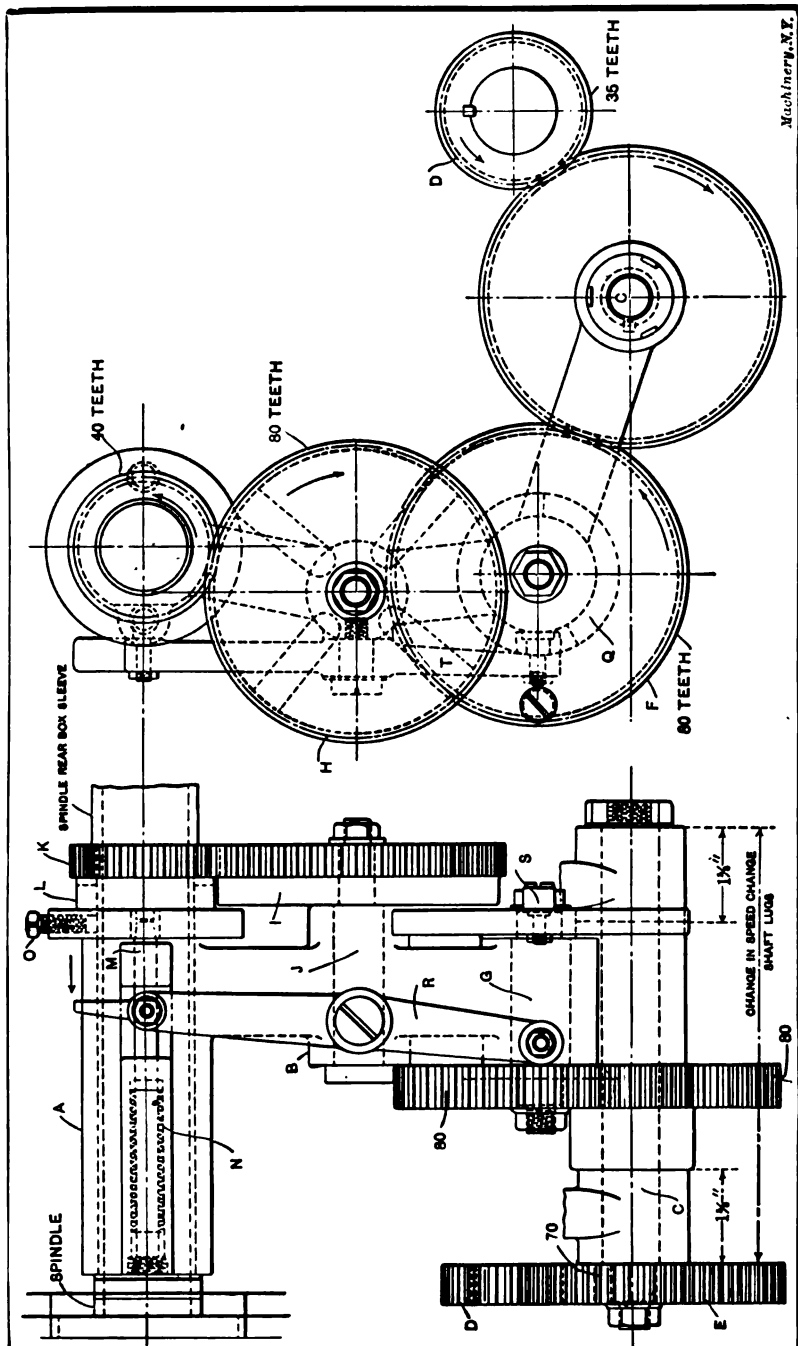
Attachment for Indexing the Main Driving Spindle of a Brown & Sharpe Automatic Screw Machine
